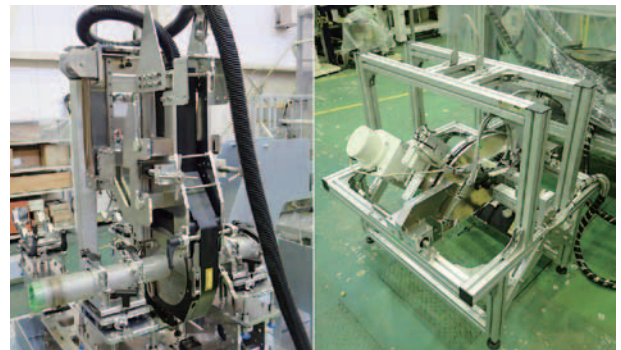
Improved remote jig (left side) and a mockup of remote RT machine (right side).
